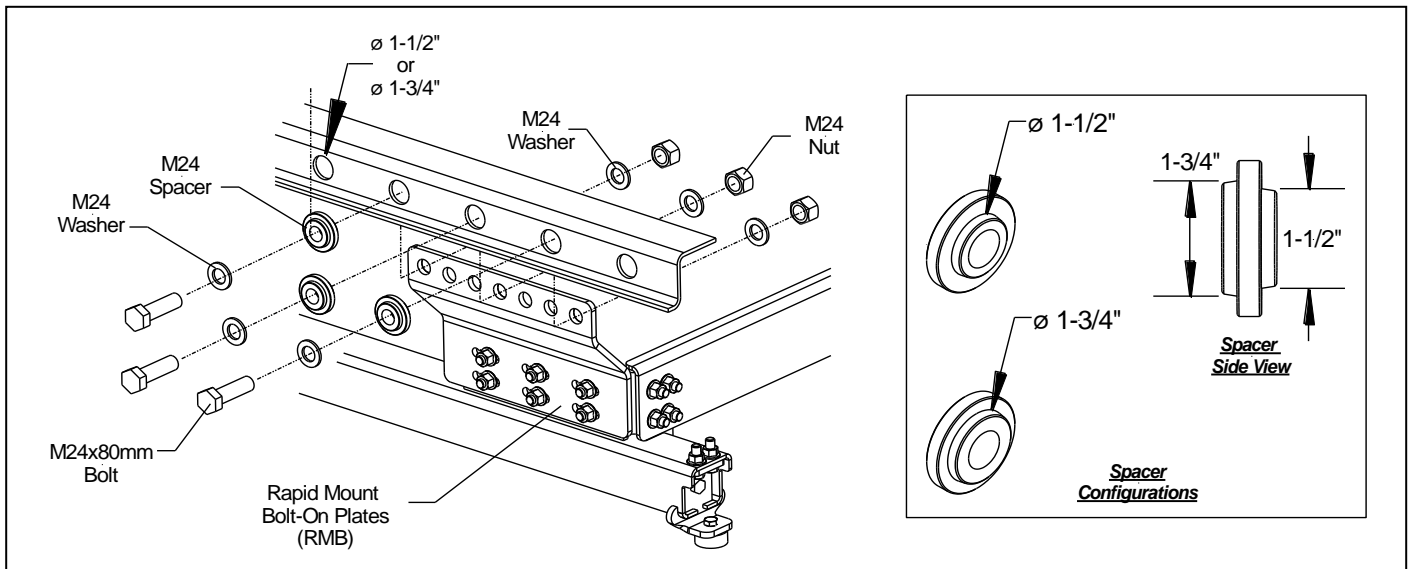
Rapid Mount Bolt-On Plates to Trailer Tandem Slide Rails
